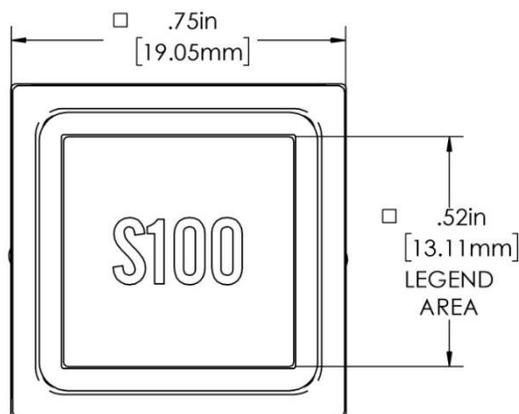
Drip-Proof – Solder/PCB and Crimp switches – Enclosure Type II solder and PCB termination and Enclosure Type V crimp termination (front view)
